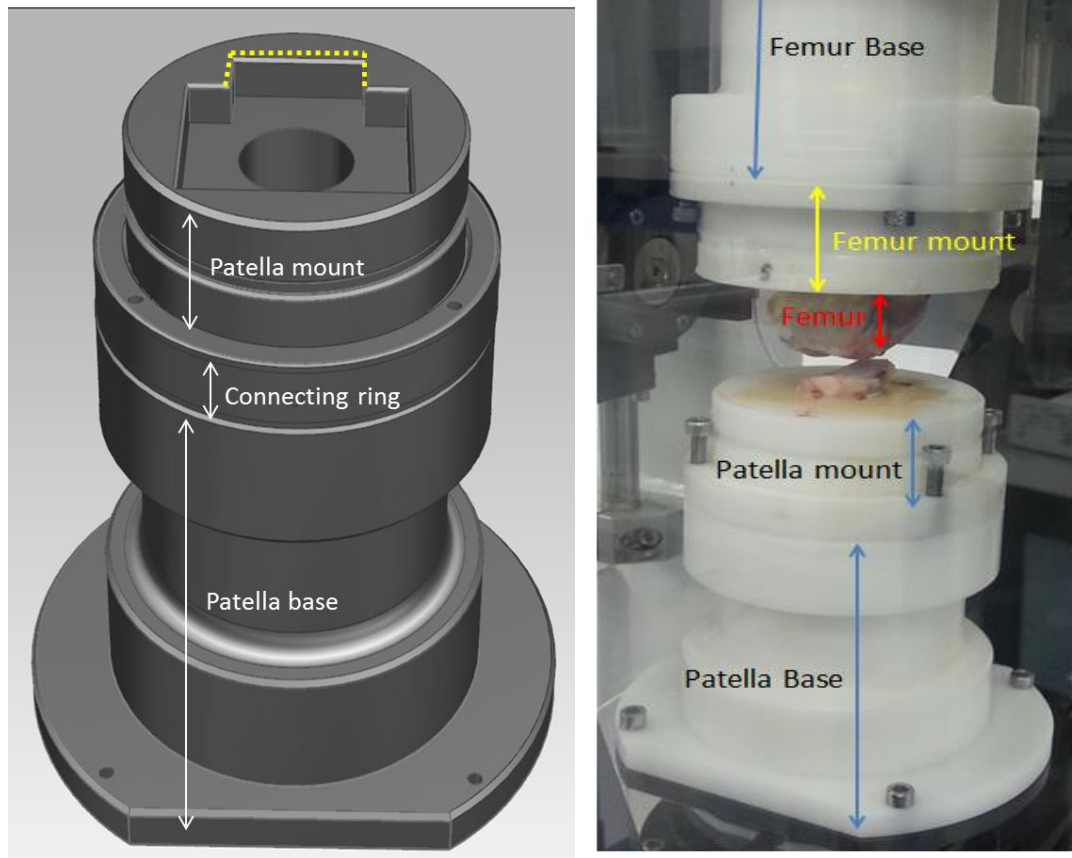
Left: Fully assembled patella fixture. The rectangular sample space is marked with the depression side for reference in yellow. Right: Manufactured Delrin PFJ fixture with the sample
